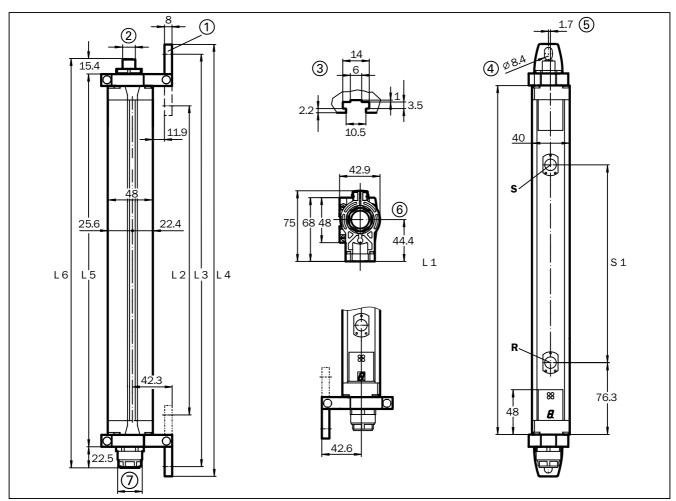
Dimensional drawings and mechanical detail, M 2000-A/P, RES, swivel mount
